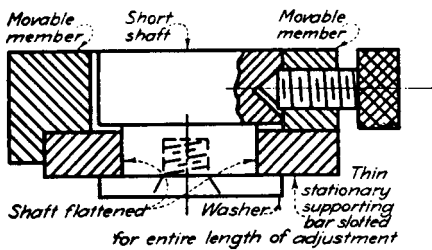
The movable member is flanged on one side and carries a conical pointed screw on the other side. A short shaft passes through both members and carries a detent slightly out of alignment with the point of the screw. This shaft is flattened on opposite sides where it passes through the stationary member to prevent it from turning when the movable member is removed. A heavy washer is screwed to the under side of the shaft. When the knurled screw is turned inward, the shaft is drawn upward while the movable member is drawn downward and backward against the flange. The shaft is forced forward against the edge of the slot. The upper member can thus be moved and locked in any position. Withdrawing the point of the screw from the detent in the shaft permits the removal of the upper member.
